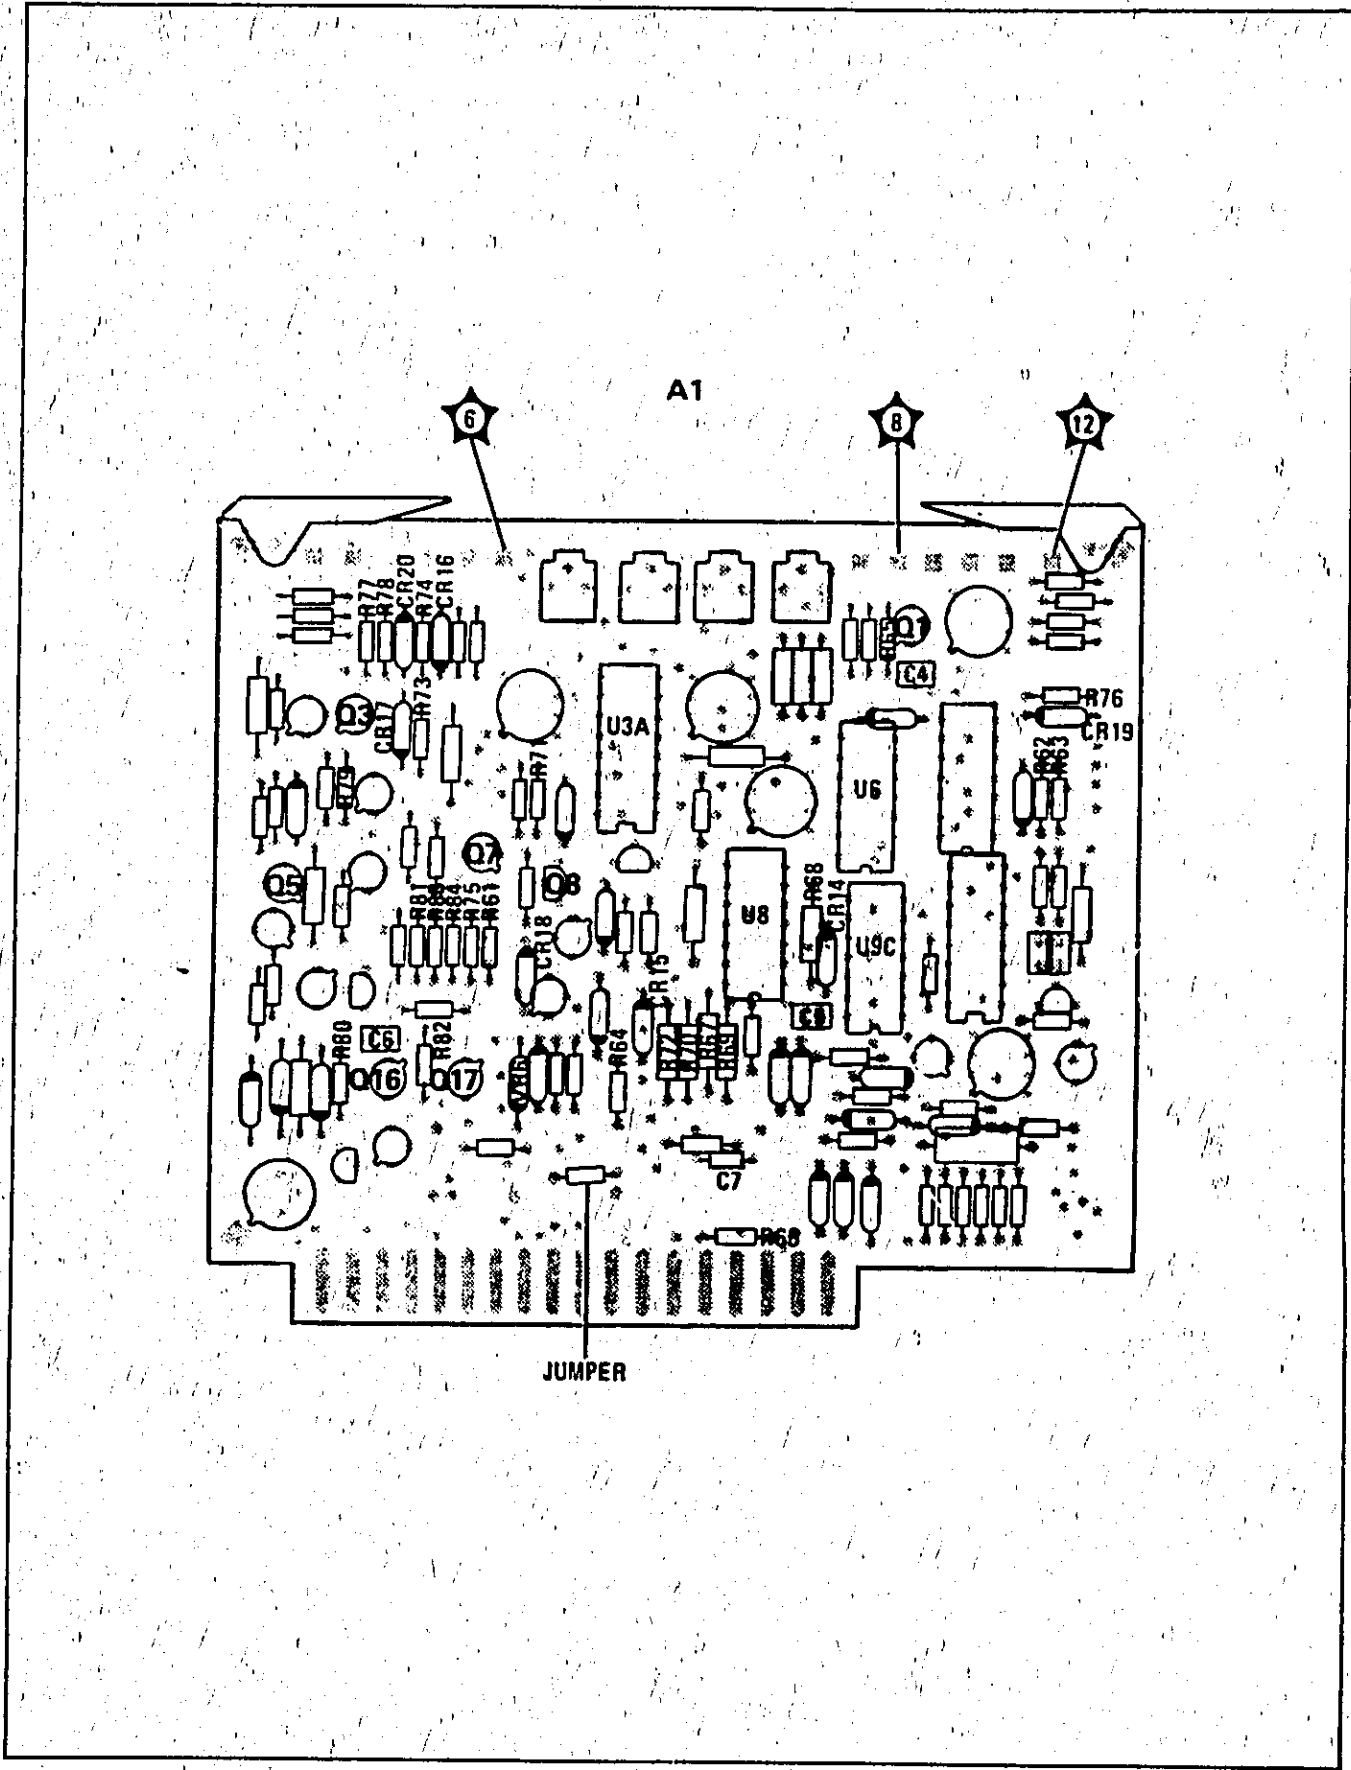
P/O A1 Sweep Generator Assembly, Component Locations (CHANGE 5)
